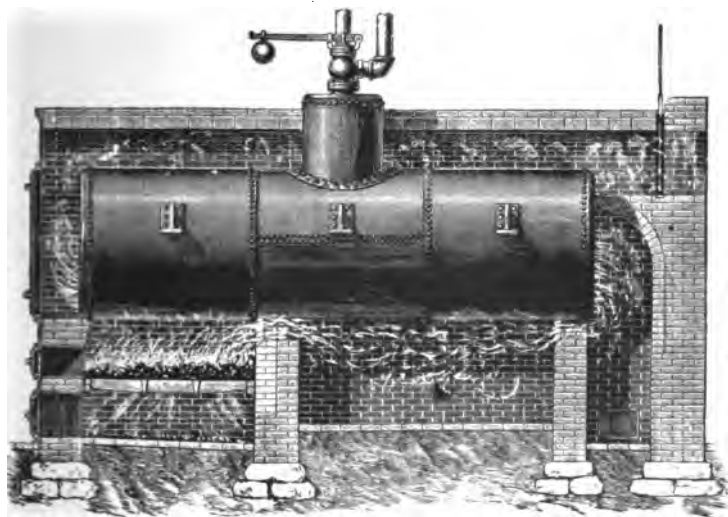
Perspective View of Tubular Boiler Set in Brickwork.
